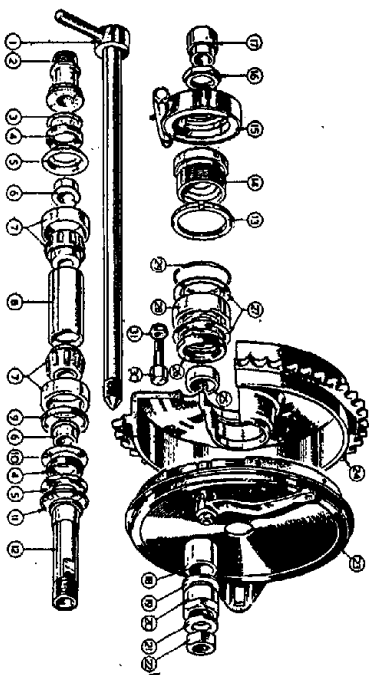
EXPLODED VIEW OF THE REAR WHEEL BEARING AND BRAKE DRUM FITTED TO 1955 MODELS.
